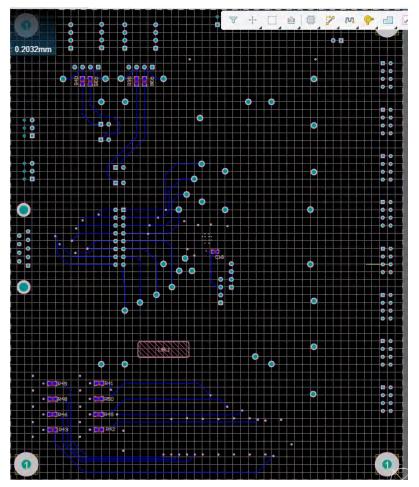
THVD4431EVM: Layout Bottom Layer
